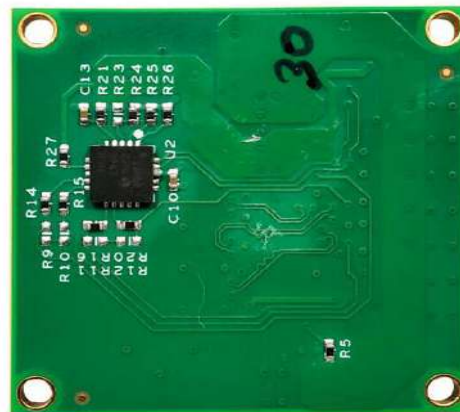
Front View of ACC\_NANO\_ADP Adaptor Board
